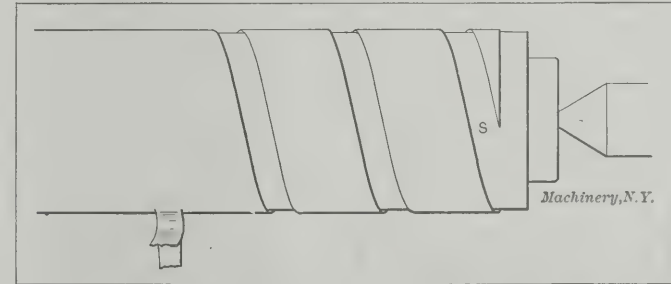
Tool taking the First Cut on a Double-thread Screw
